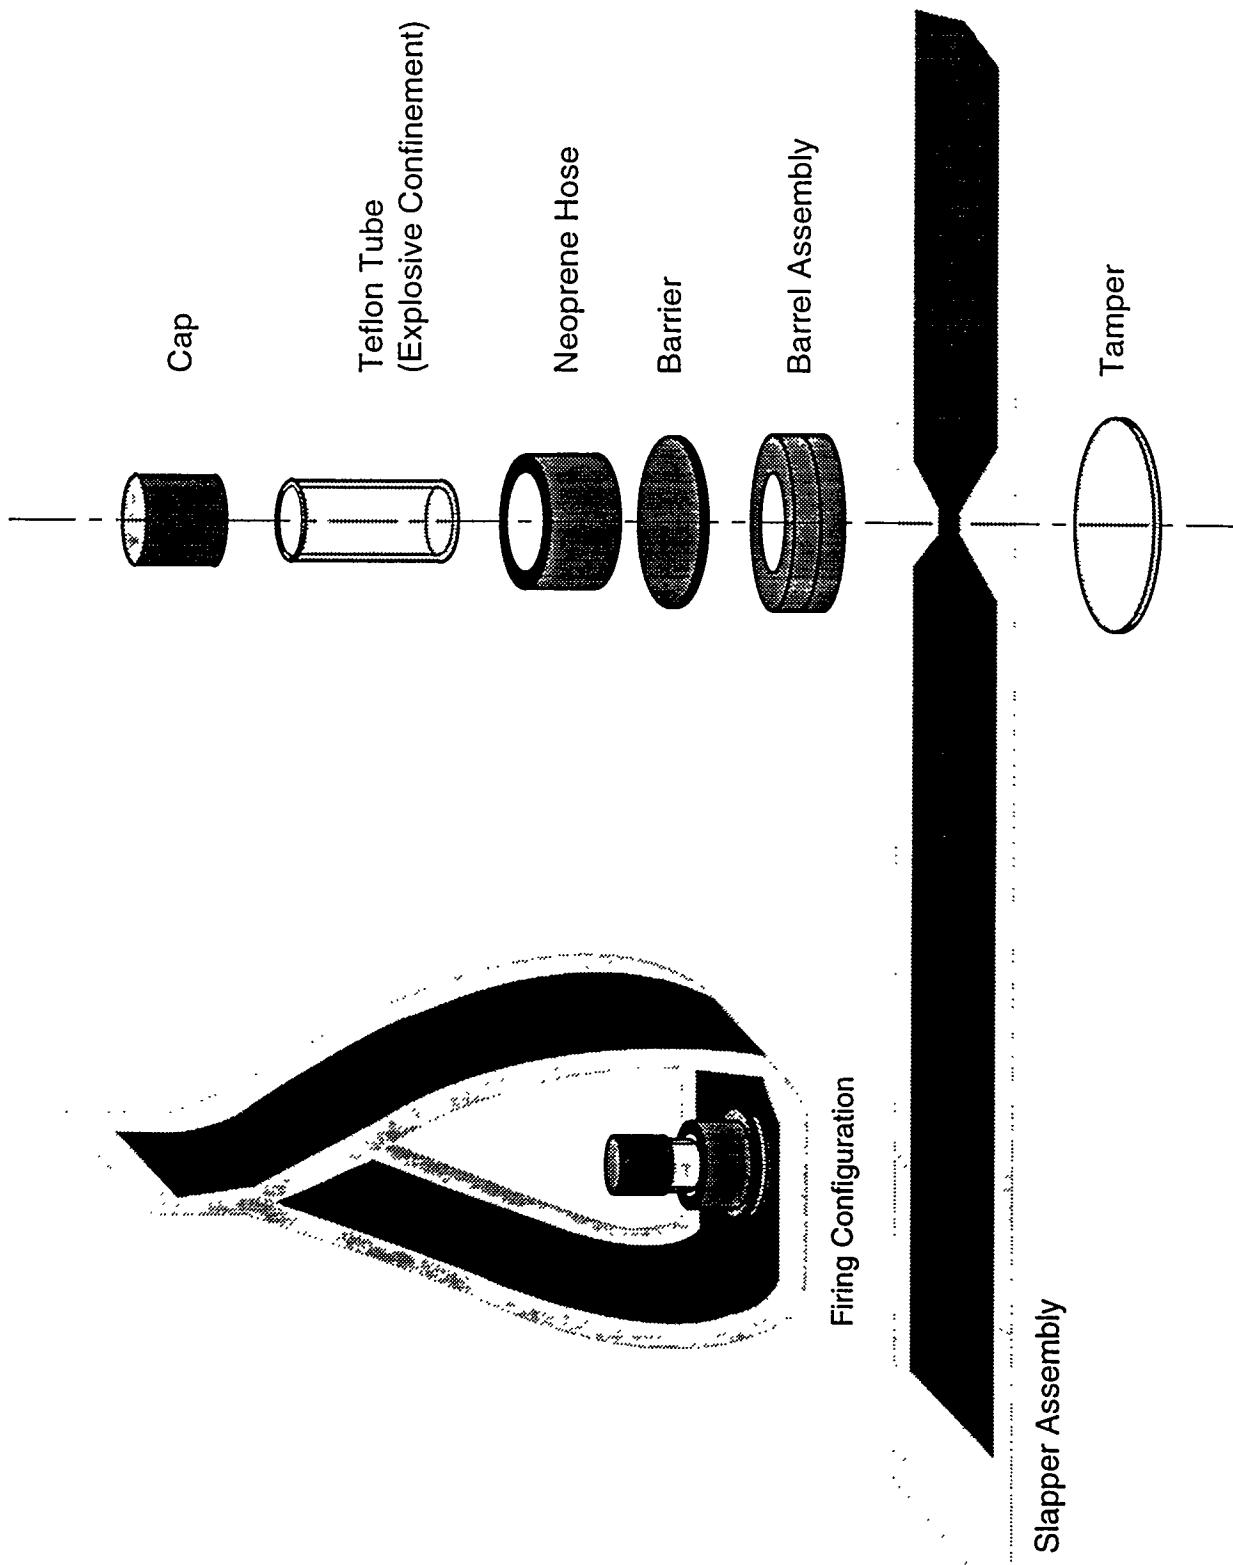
Explosive assembly with a barrier in place between the barrel and the explosive. This is the type of assembly used in the EMRTC experiments.
